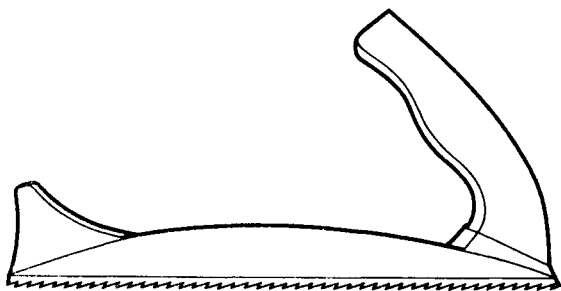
The shaper plane which is a new type of forming plane with replaceable blade.
